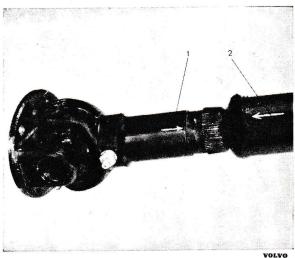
Assembling universal joint. Assemble universal joint with the arrows exactly opposite each other.
